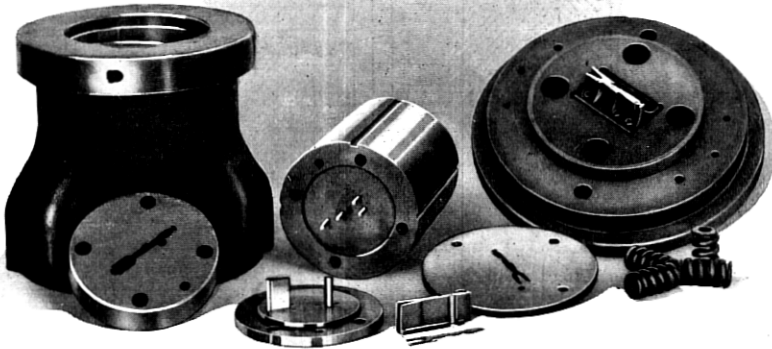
Sub-press compound punch and die partially disassembled to show construction.
